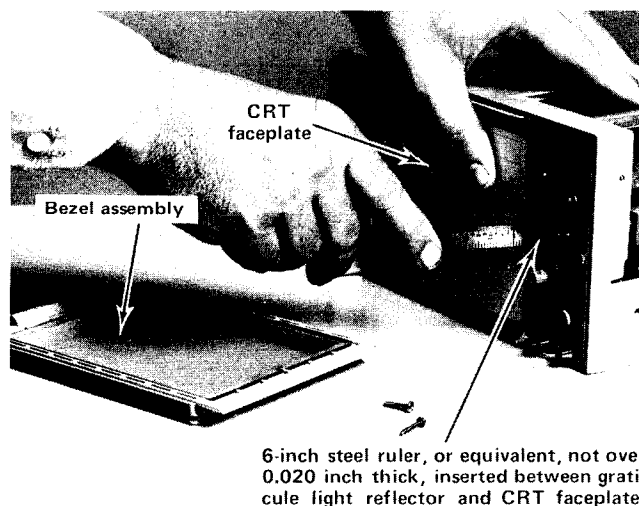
Illustration showing equipment and method used to correctly align light reflector with crt faceplate.
